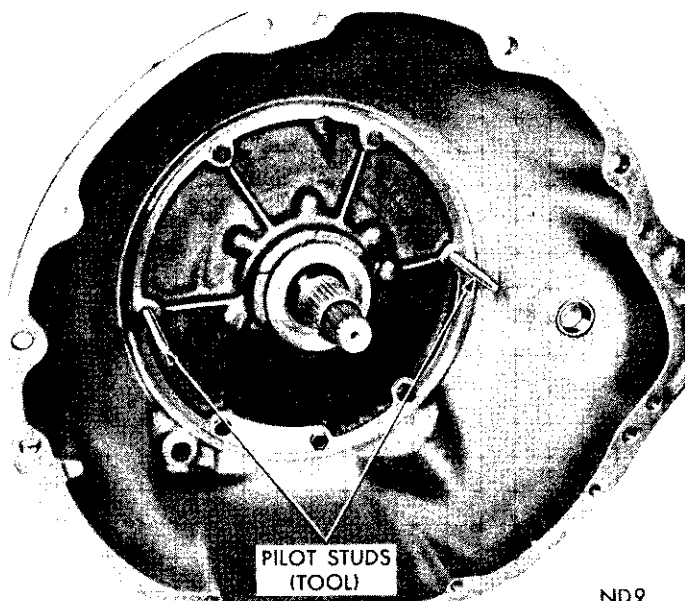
Installing Pump and Reaction Shaft Support Assembly
